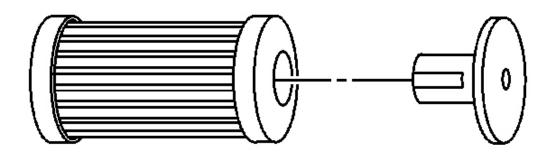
View Of A/C Filter And Check Valve Courtesy of GENERAL MOTORS CORP.
